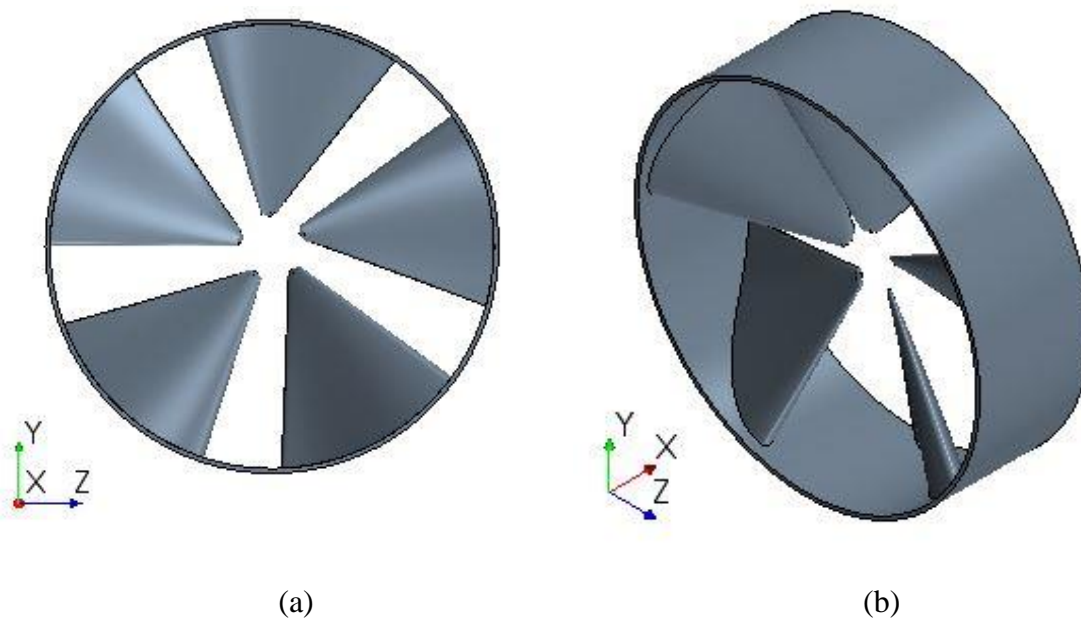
CAD for the proposed hubless RDT (a) Front view (b) Isometric view
